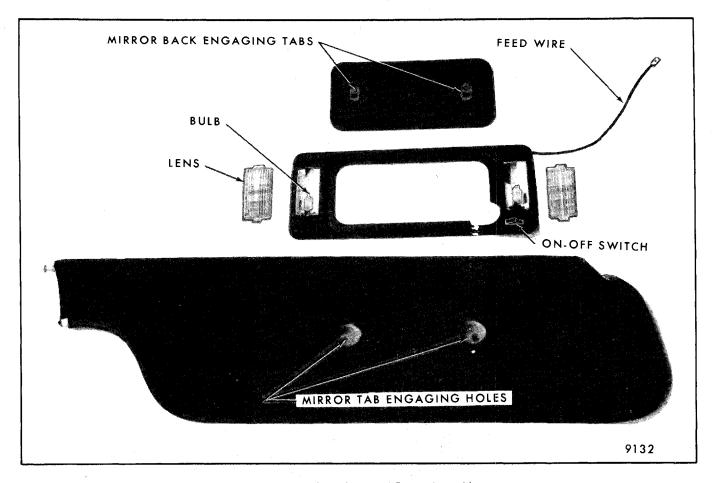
Vanity Mirror and Lamp Assembly
